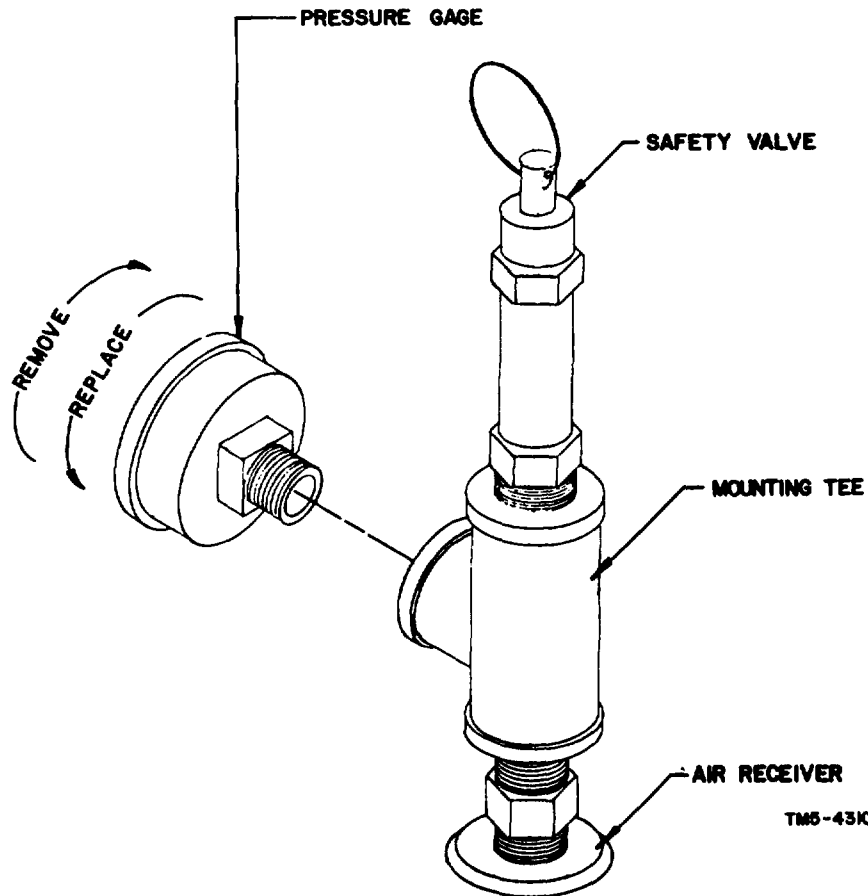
PRESSURE GAGE REMOVAL AND REPLACEMENT
